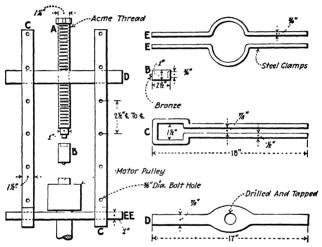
Construction details of a home-made pinion and pulley remover. (*Electrical World*, Vol. 77, No. 1, Page 50.)
